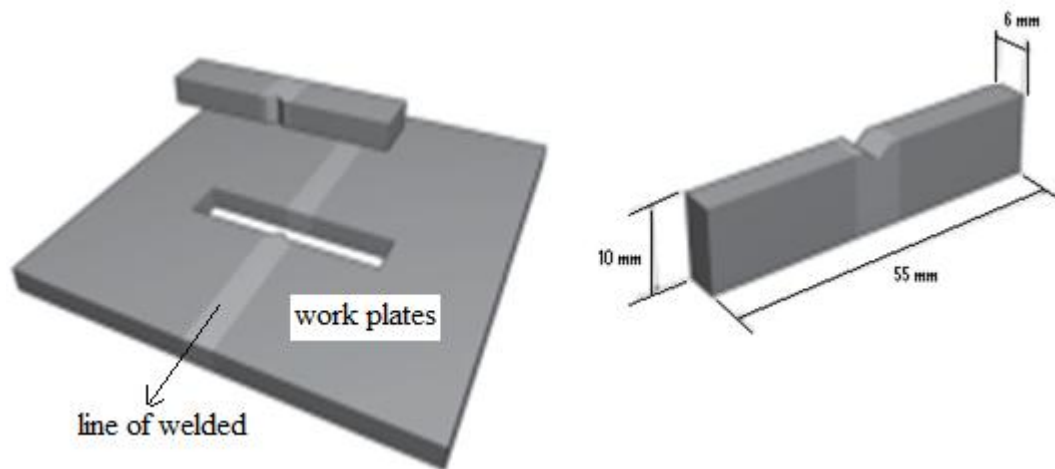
Scheme of the machining of the Charpy specimens from the FSW plates and dimensions of the sub-size specimens used for the tests.[21]
